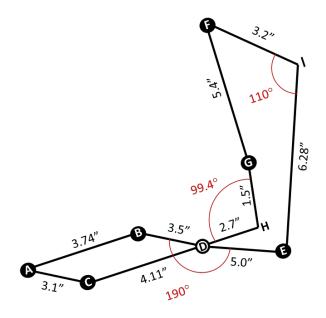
Mechanism linkage dimensions for a 6 in diameter nozzle
